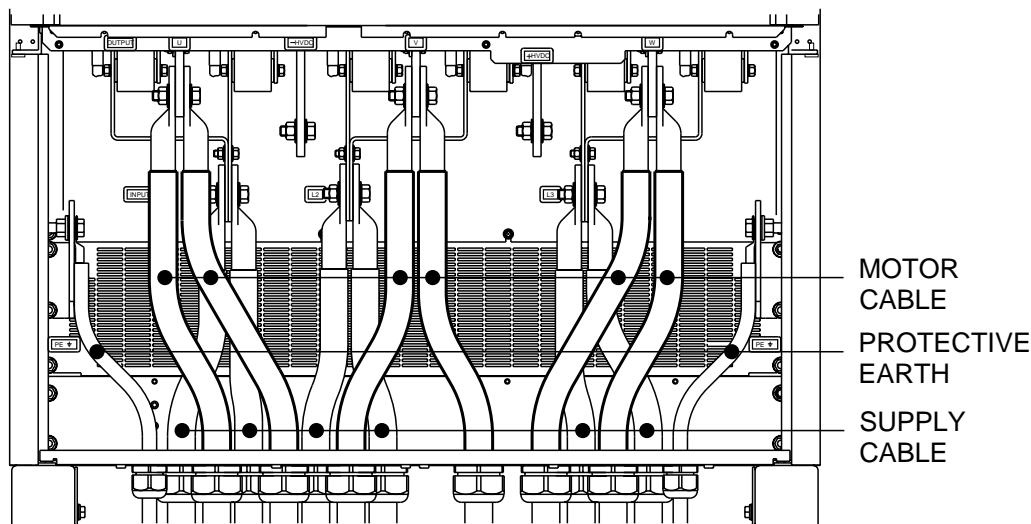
Ultradrive E-Series Frame 6 Screened Motor Cable Configuration
